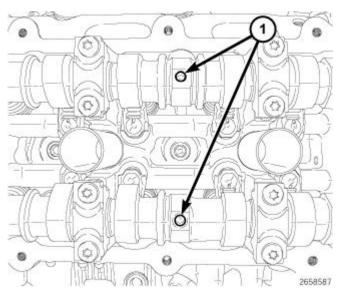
Positioning Camshaft Alignment Holes Vertically Courtesy of CHRYSLER GROUP, LLC
